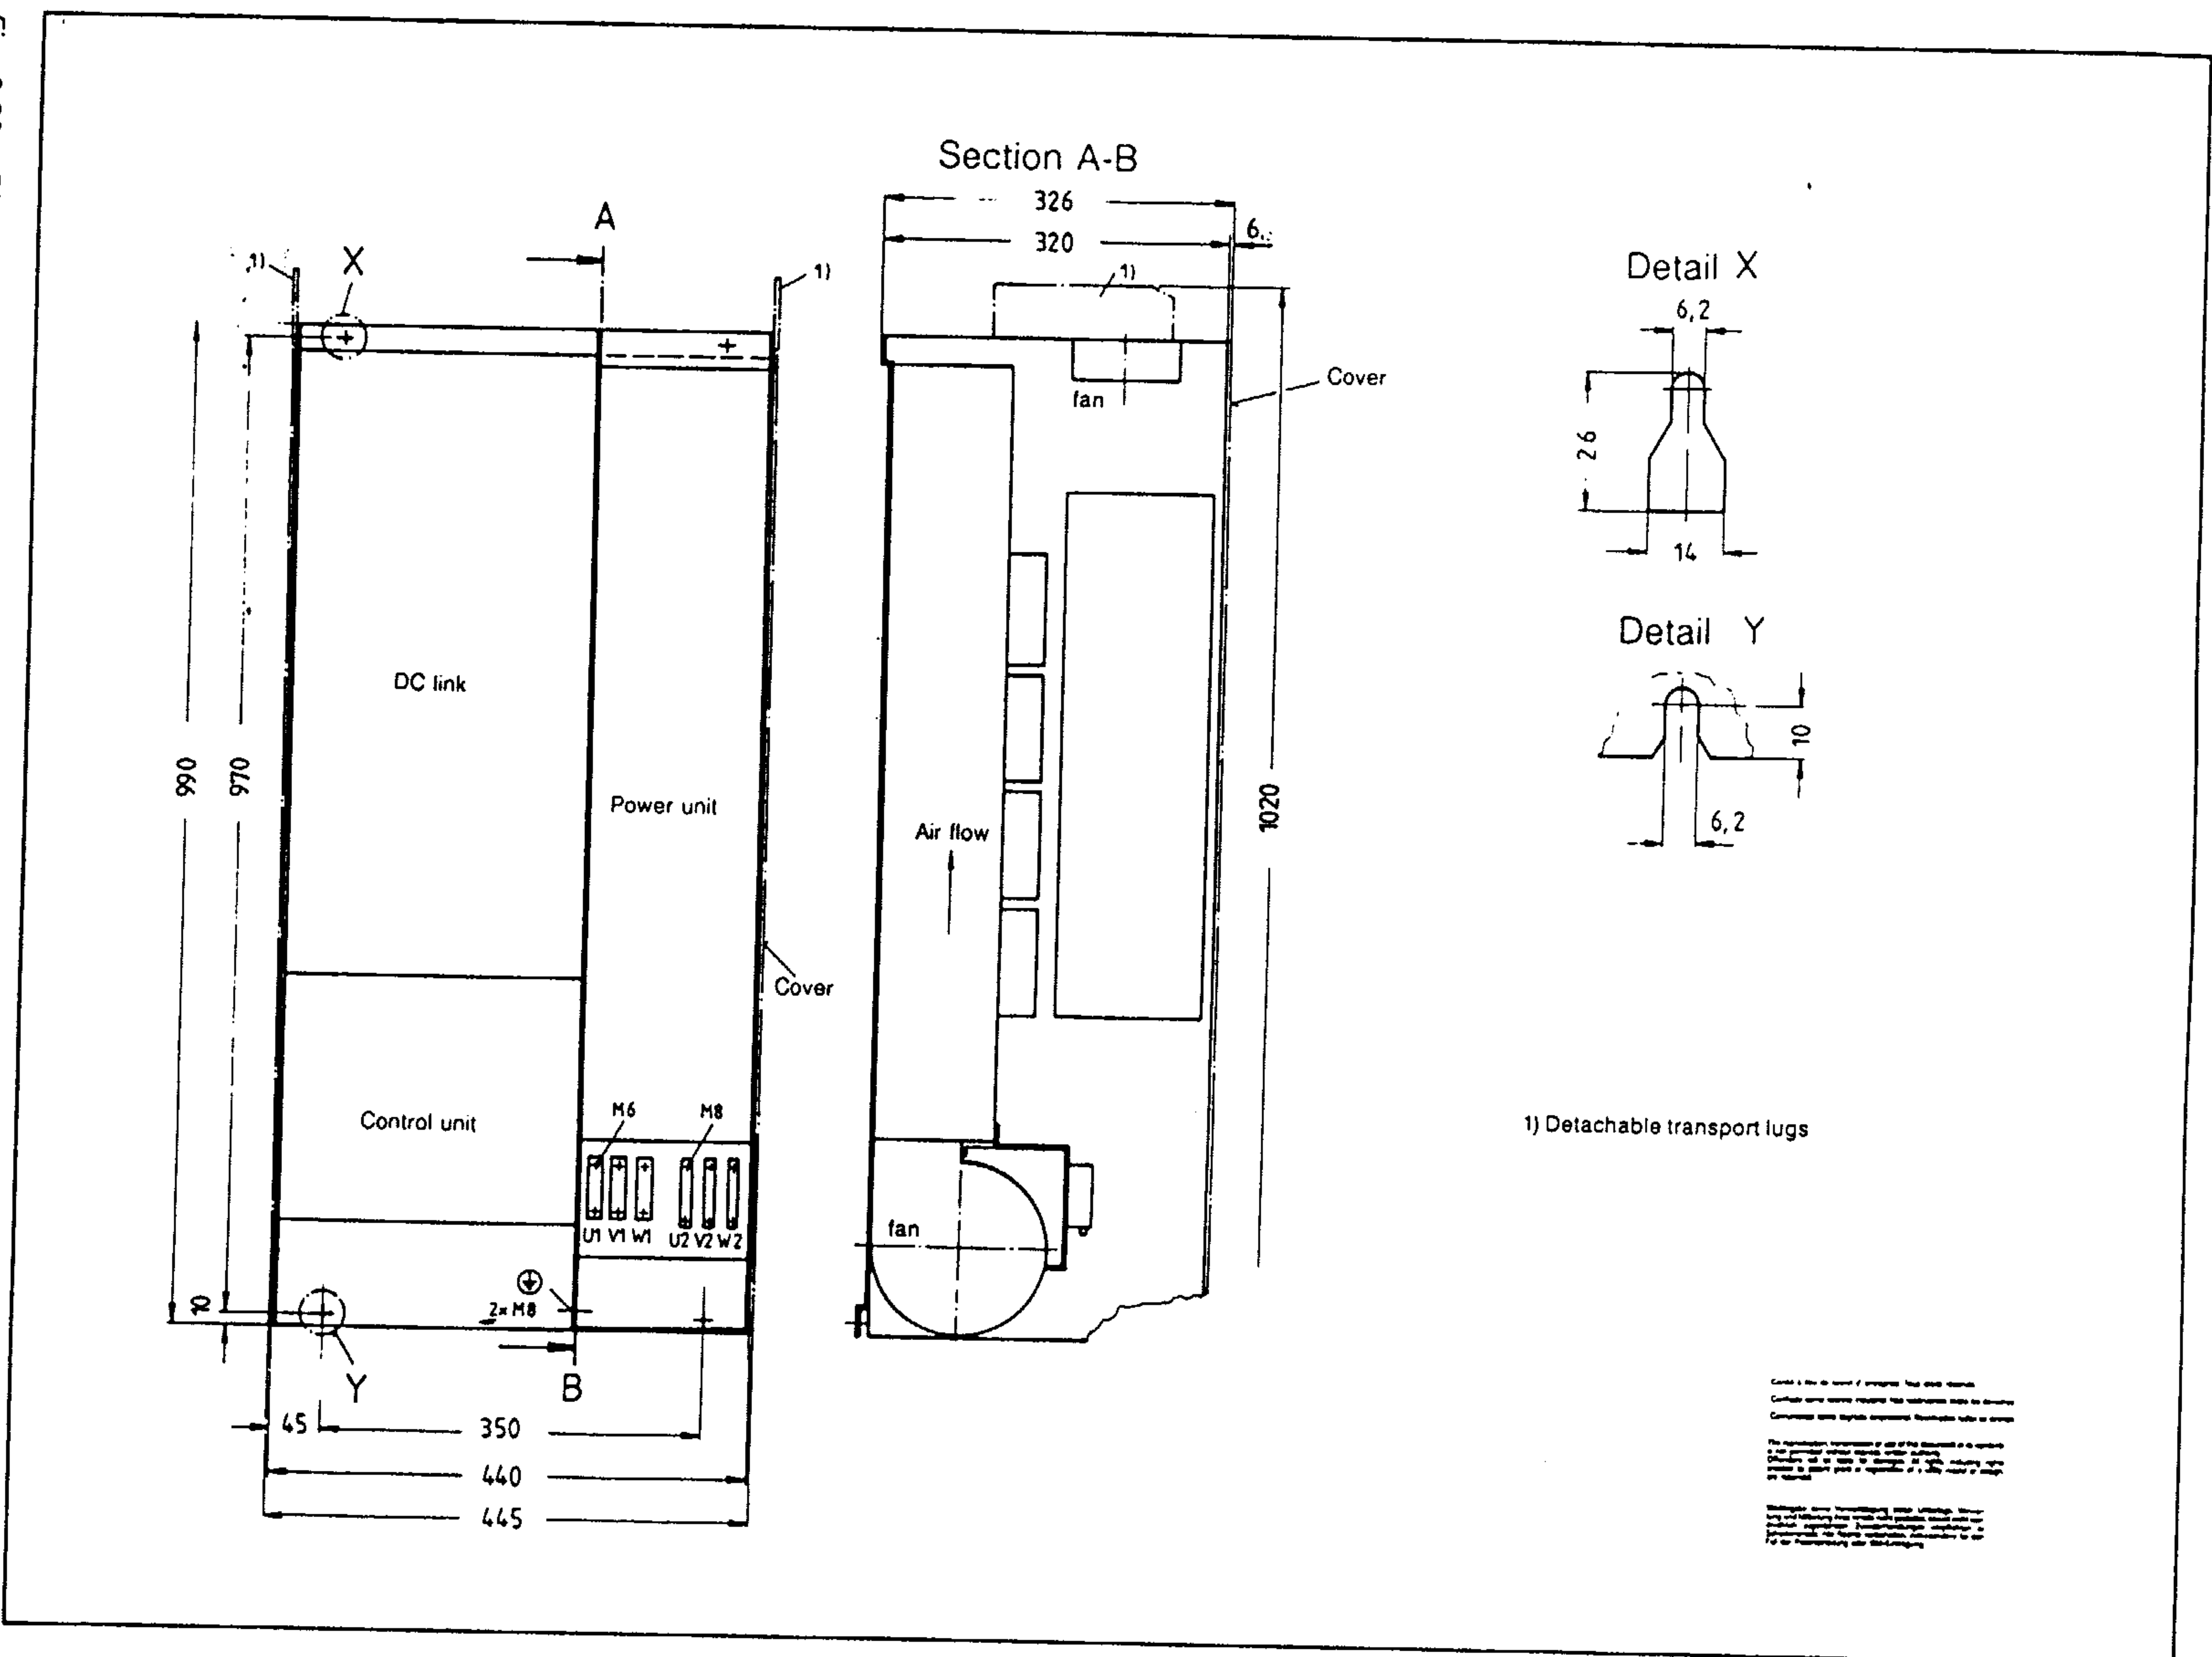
Dimension sheet for PWM converters 6SC6504 and 6SC6506 (dimensions in mm, not to scale)
